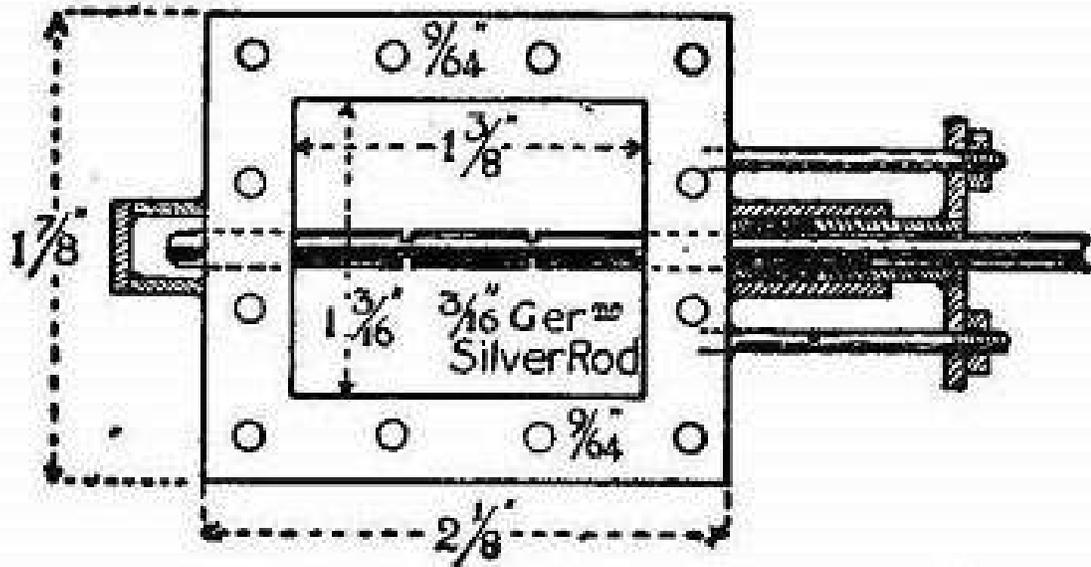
Wall-piece for steam chest, with gland and valve rod in position.
